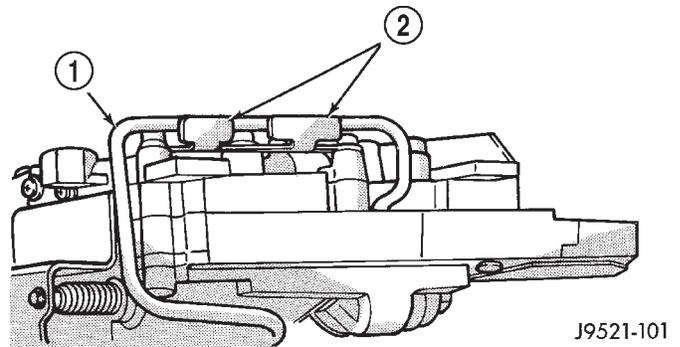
Accumulator Housing, Valve Springs, and Plug
